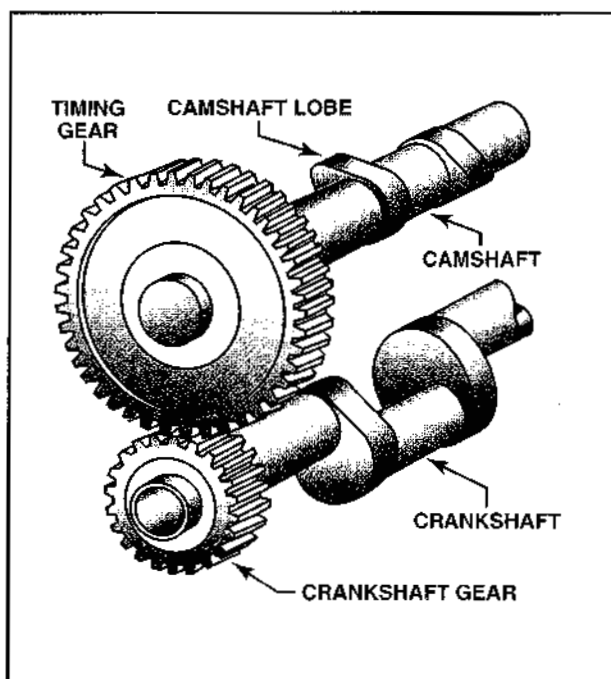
In the typical opposed engine, the camshaft timing gear has twice as many teeth as the crankshaft gear. The camshaft rotates at one-half of the crankshaft's speed.
